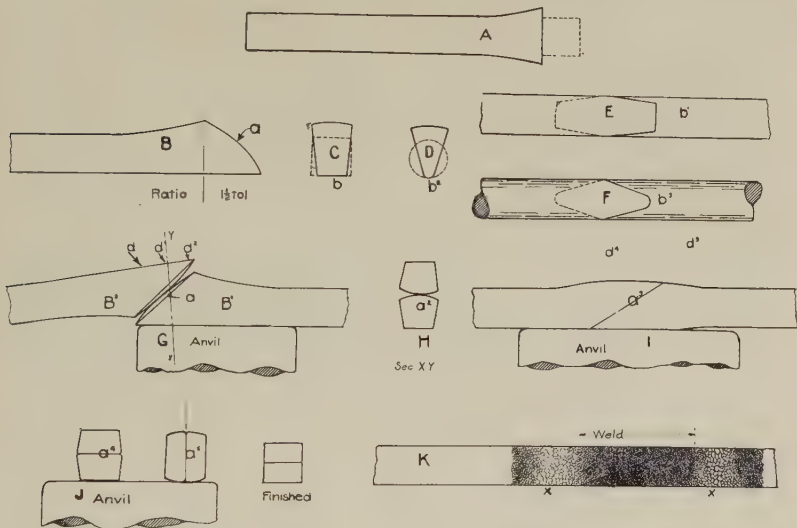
Illustrating Some of the Principles of Making a Scarf Weld.
